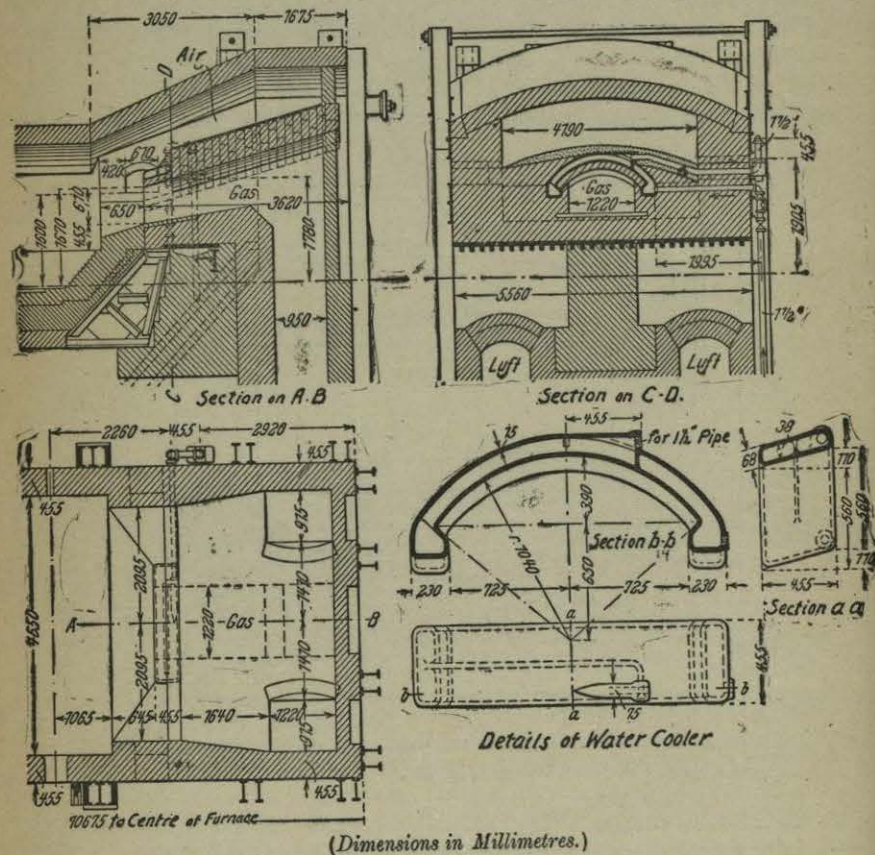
Sectional Elevations, Plan, and Details of an Open Hearth Furnace "Block," with Bronze Water Coolers, in use at Gary Works, U.S.A.
